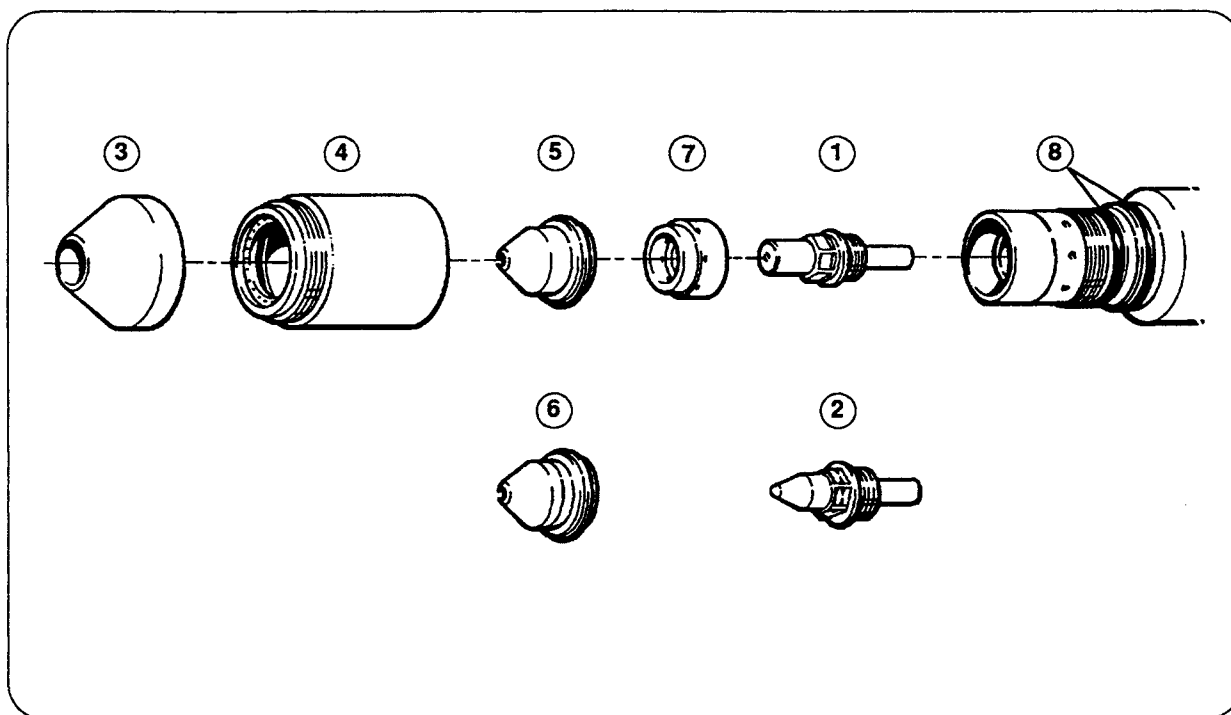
PAC160E Gouging Torch Consumable Parts
